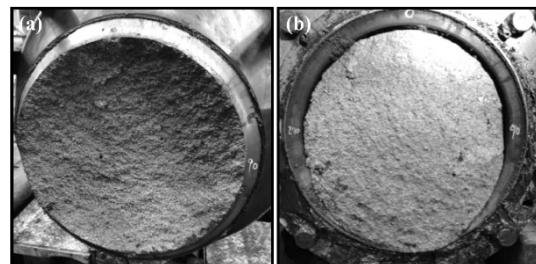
Fracture surface of (a) Part A and (b) Part B.
